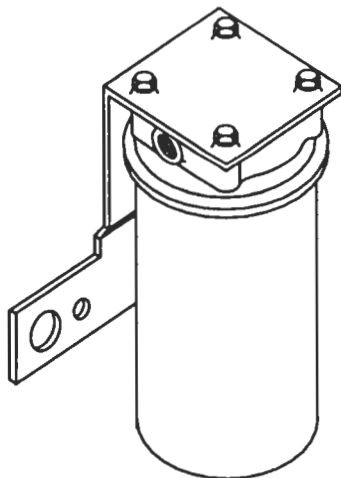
Coolant Filter and Conditioner (Spin-on Type)
